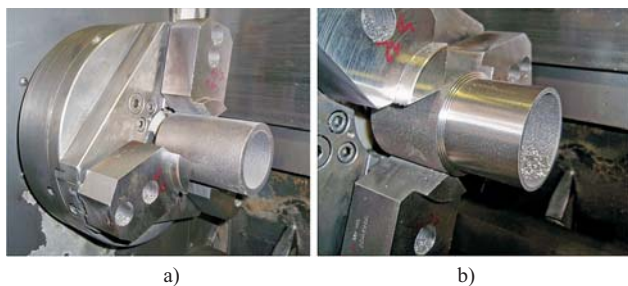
Clamped sleeves: before machining (a) and after machining (b)
